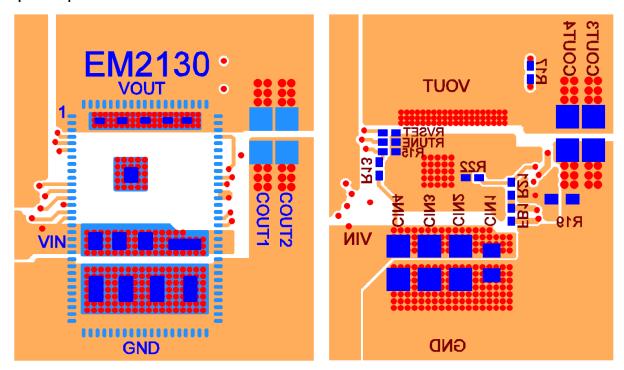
Top And Bottom Layer Of The Minimum Footprint Layout Example
